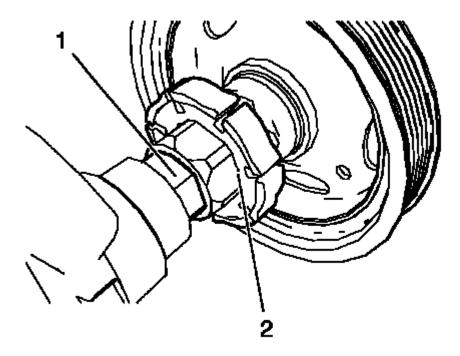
Crankshaft Balancer And Bolt Courtesy of GENERAL MOTORS COMPANY
